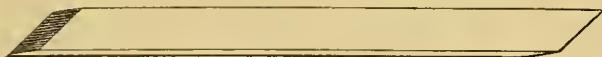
CORK JOINT FOR FLUTE SHOWING BEVELLED ENDS.
